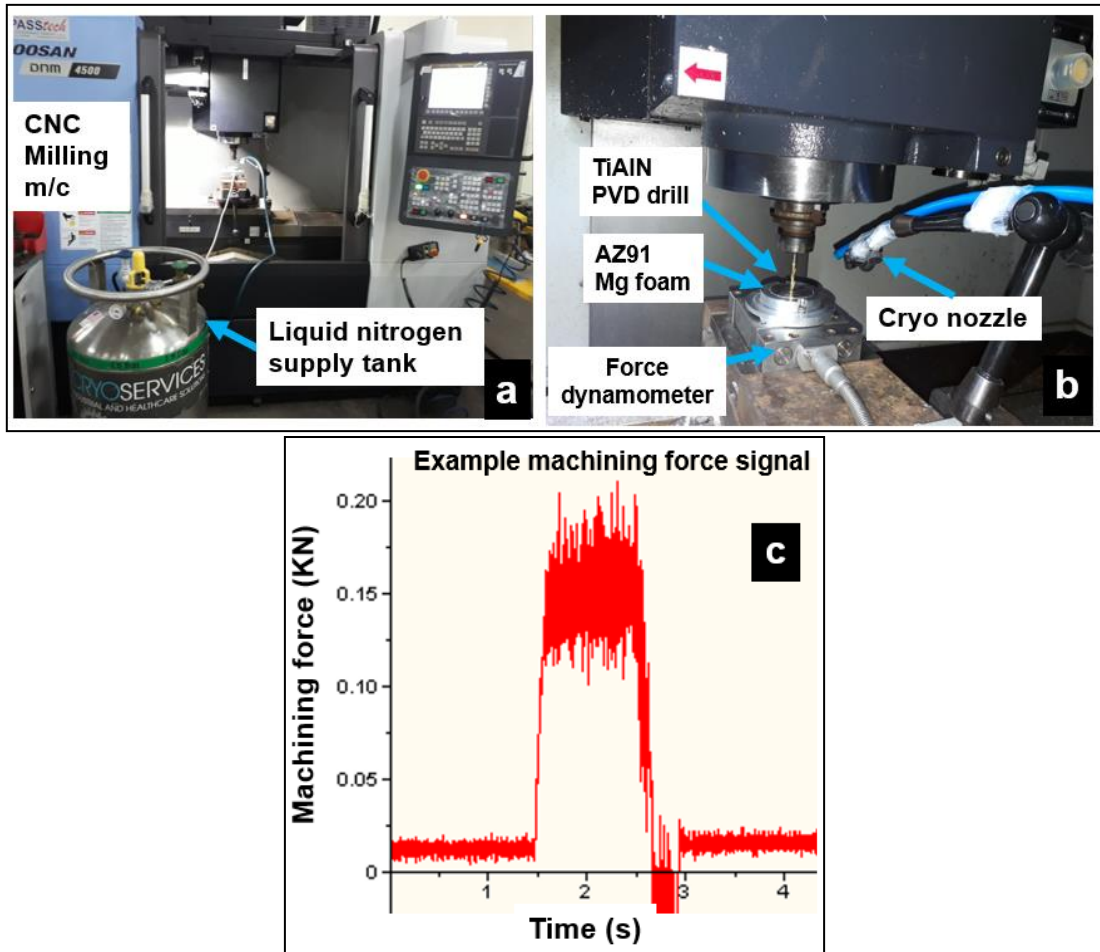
2 a) Machine tool, b) drilling process and c) measured drilling force trace.
